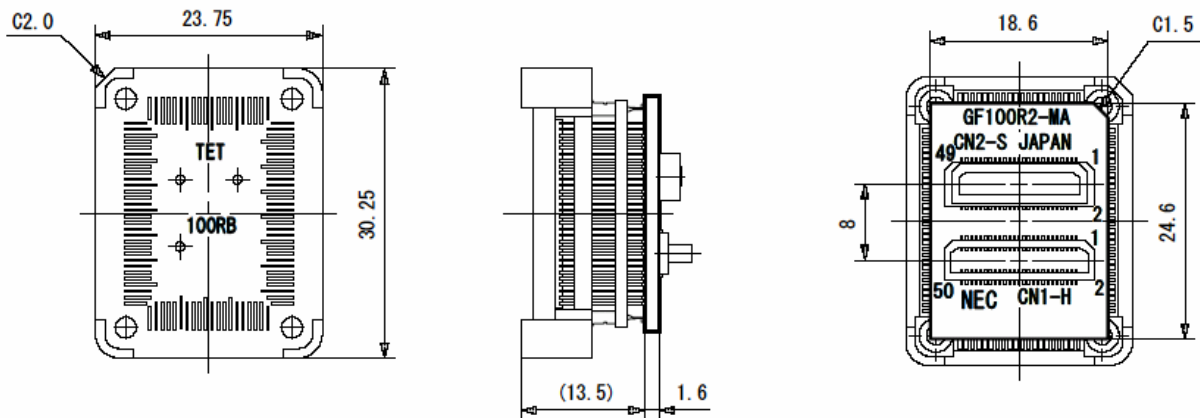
Mounting Adapter for V850E/IA4 (100-Pin GF Package)
